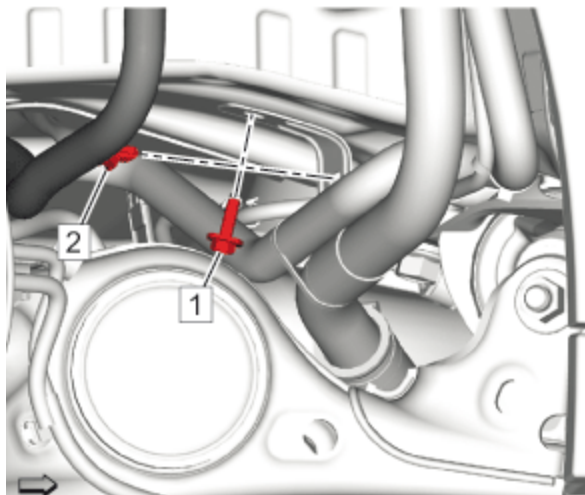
Fuel Tank Filler Pipe Ground Bolt And Wiring Harness Clip
